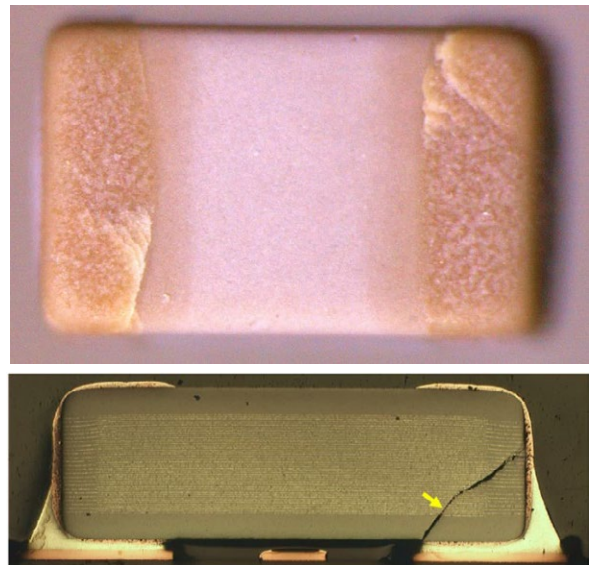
Cracking of a ceramic capacitor, e.g. caused by PCB-bending when plugging a PCB connector. In most cases, the cracks are hidden under the solder caps, which need to be chemically removed (top image). Bottom image (courtesy of RoodMicrotec): Cross sectional view of a hidden crack.
